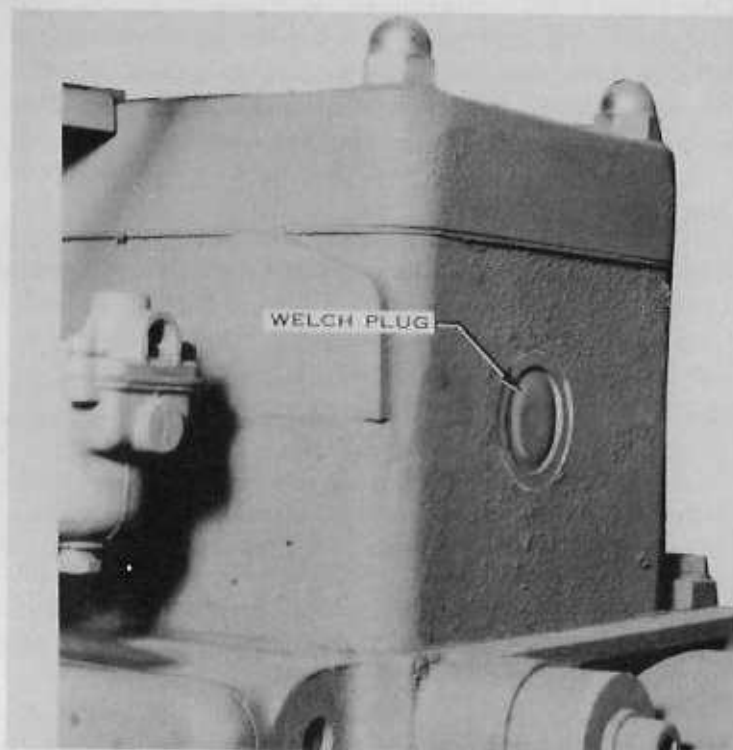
WELCH PLUG IN CYLINDER BLOCK
